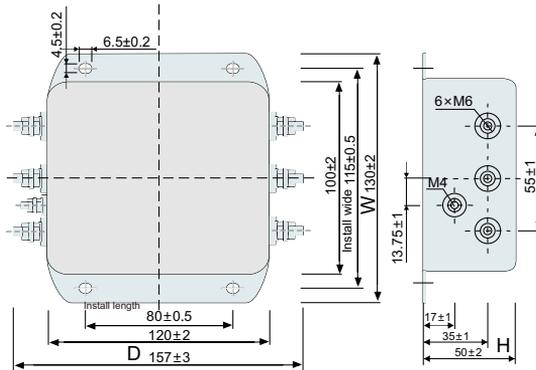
Simple Filter Outline and Installation Dimension Figure
